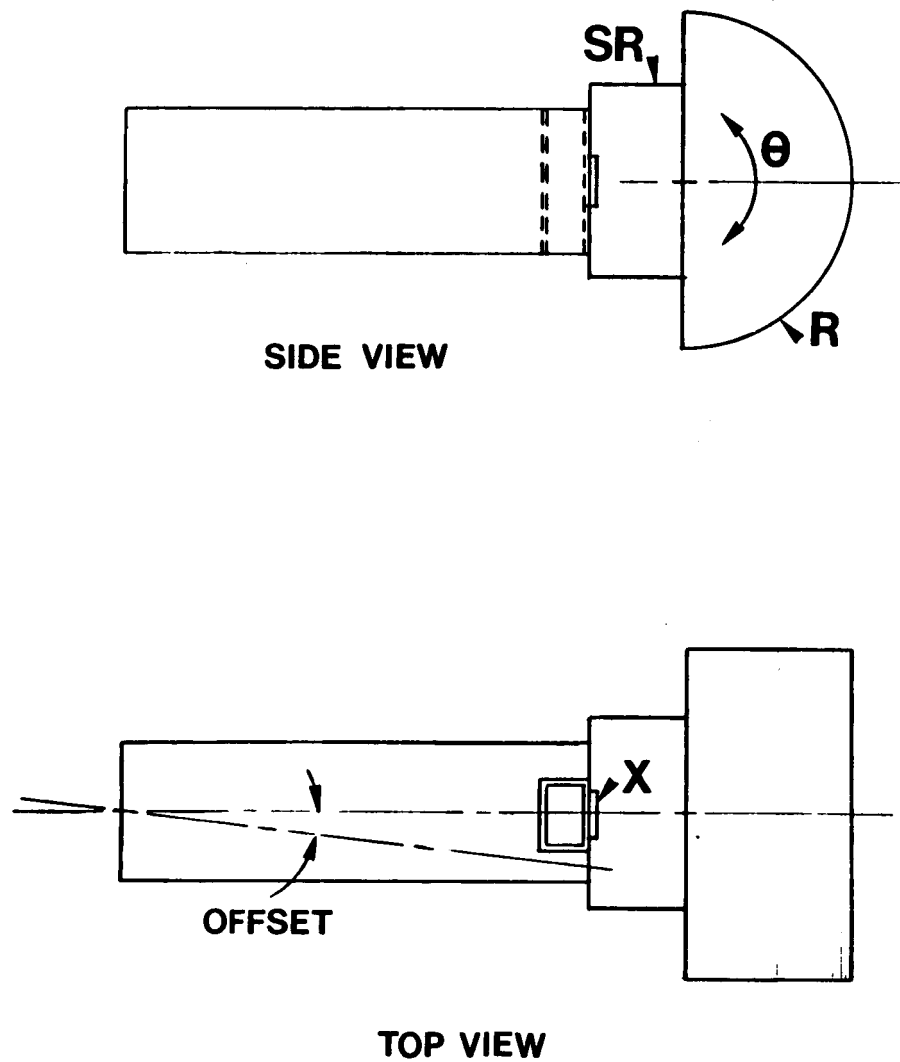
Reflector Alignment Detail. R, reflector which rotates through θ ; SR, silicone rubber; x transducer mounted on a square brass tube set in supporting rod which may be offset at fixed angles.
